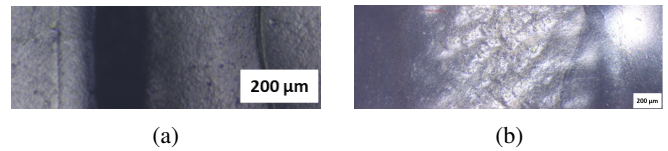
Resulting weld morphology through exploring the implementation of (a) the ZnSe window and (b) the modified heat sealer from [4].
